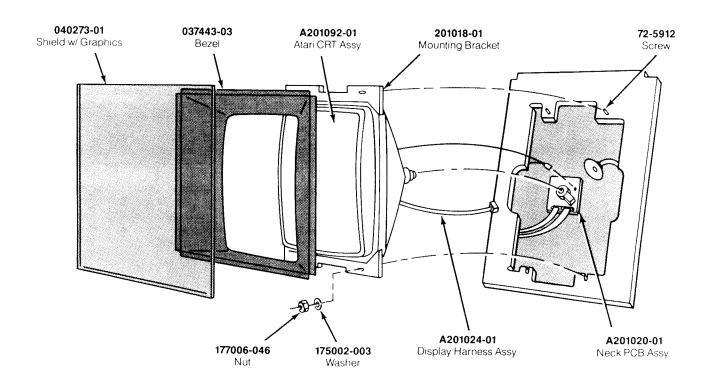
Atari Video Display Assembly A039650-01 A Parts List
